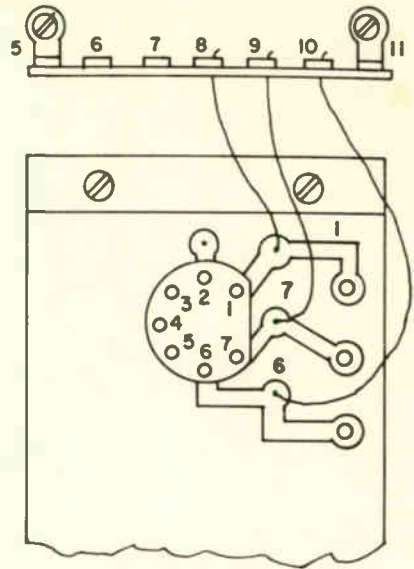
Wiring connecting the tube socket to the terminal strip.
